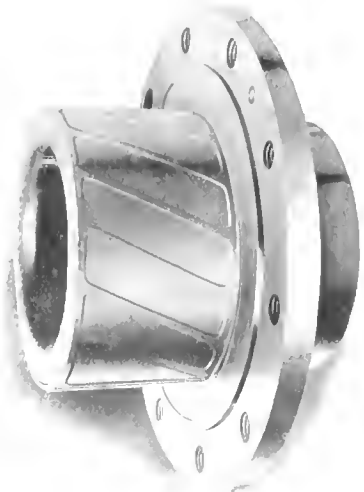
Enlarged View of Balancing Plug showing Balancing Chambers
